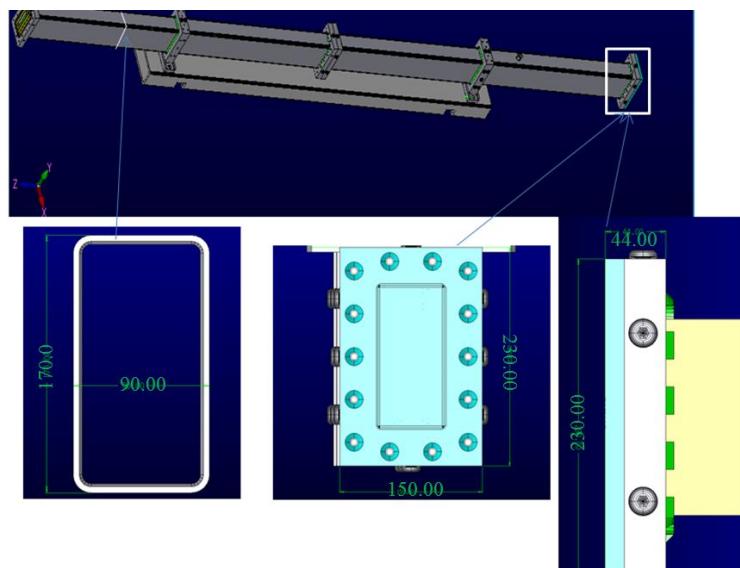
External guide dimensions (mm).(The supporting legs will be removed.)
